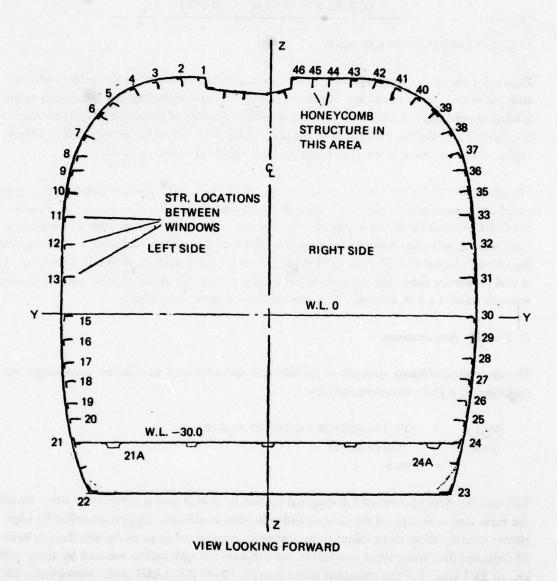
Typical Cross Section of the CH-47A Center Section Showing Stringer Location, F.S. 160 to F.S. 440.
